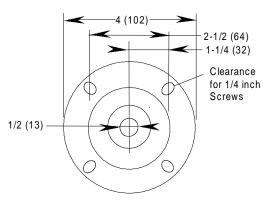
Auxiliary Mounting Bracket, inches (mm)
